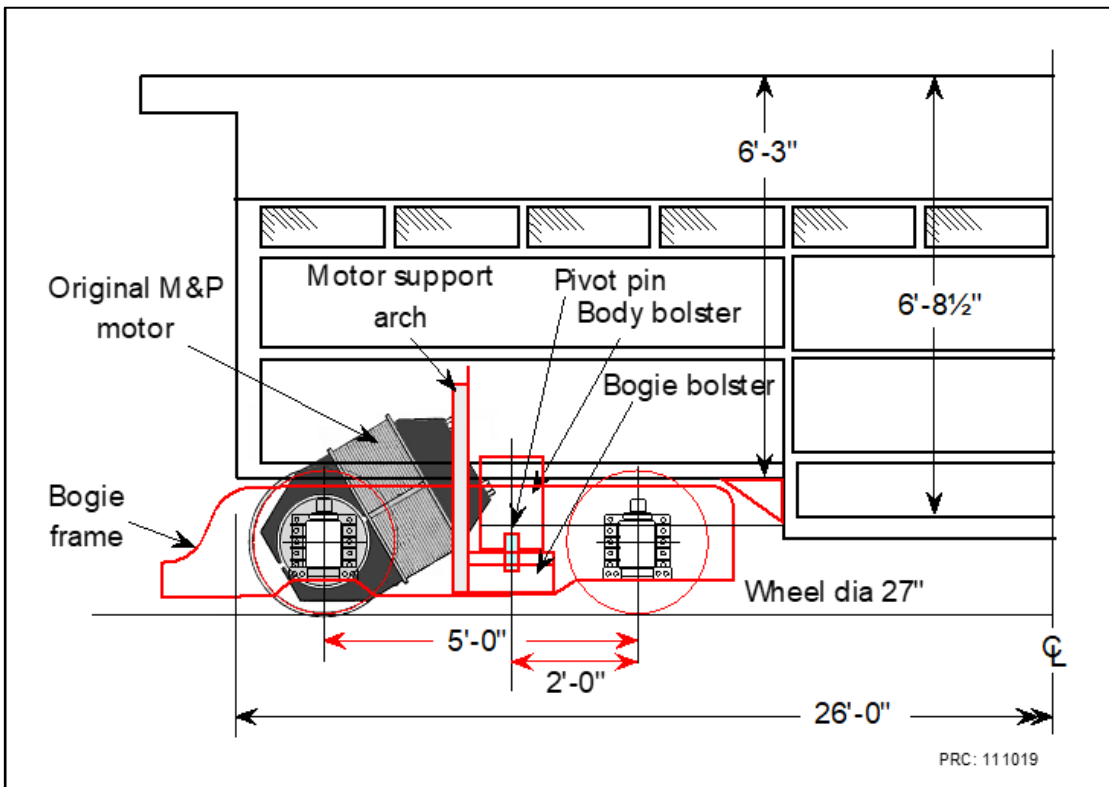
A schematic side view demonstrating how a M&P motor could have been fitted to a C&SLR Ashbury car with a motor bogie. The motor is held at an angle of 60 deg. by a hook attached to the motor support arch. The motor support arch is attached to the bogie bolster structure so that it clears the body bolster when the bogie rotates on a curve. Note that the bogie wheelbase is 5ft 0 ins and the pivot point is set at 2 feet from the rear axle, giving an asymmetrical layout. The wheel diameter is 27 ins., the same as the C&SLR's locomotives of the period. The drawing is not exactly to scale as the necessary data is not available. Drawing: P. Connor.
